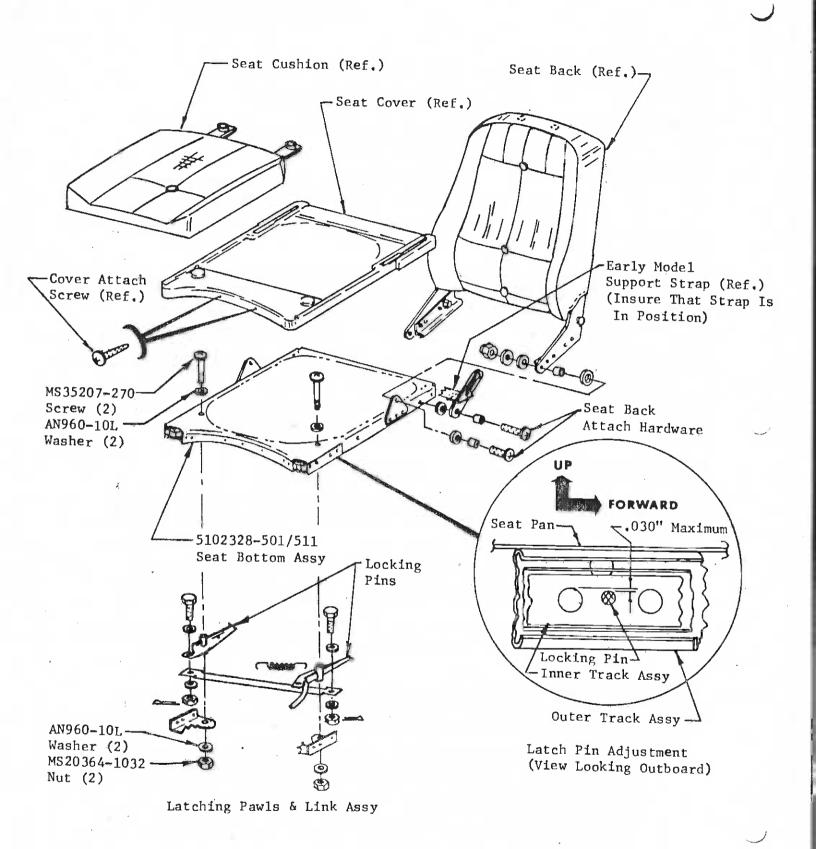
Front Seat Bottom Installation (LH Early Model Shown; RH & Late Model Similar)
